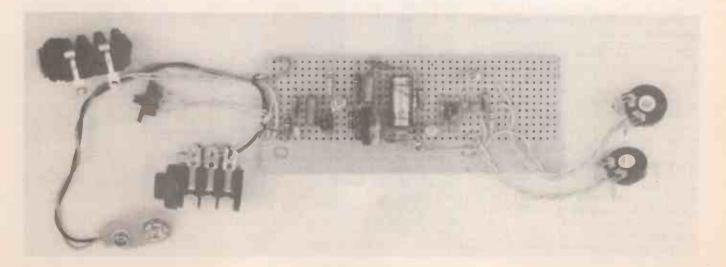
Interwiring to all off-board components. The soldered connections at each end of resistor R15 should be covered with insulation tape.
